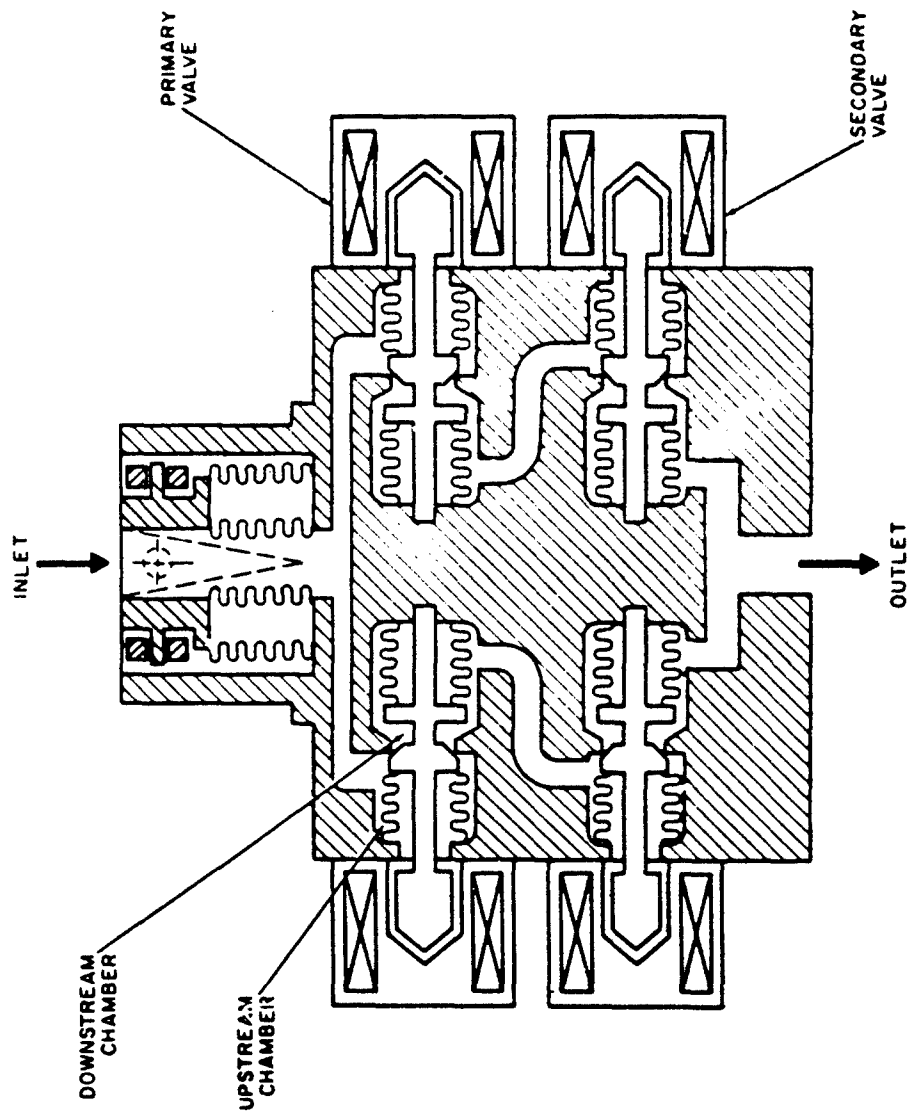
SCHEMATIC OF QUAD-VALVE PACKAGE
